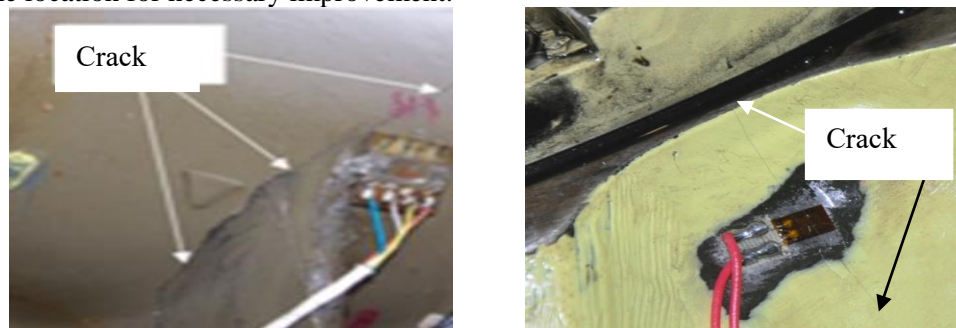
Coarse and long crack at tail gearbox housing slim crack at main gearbox housing
